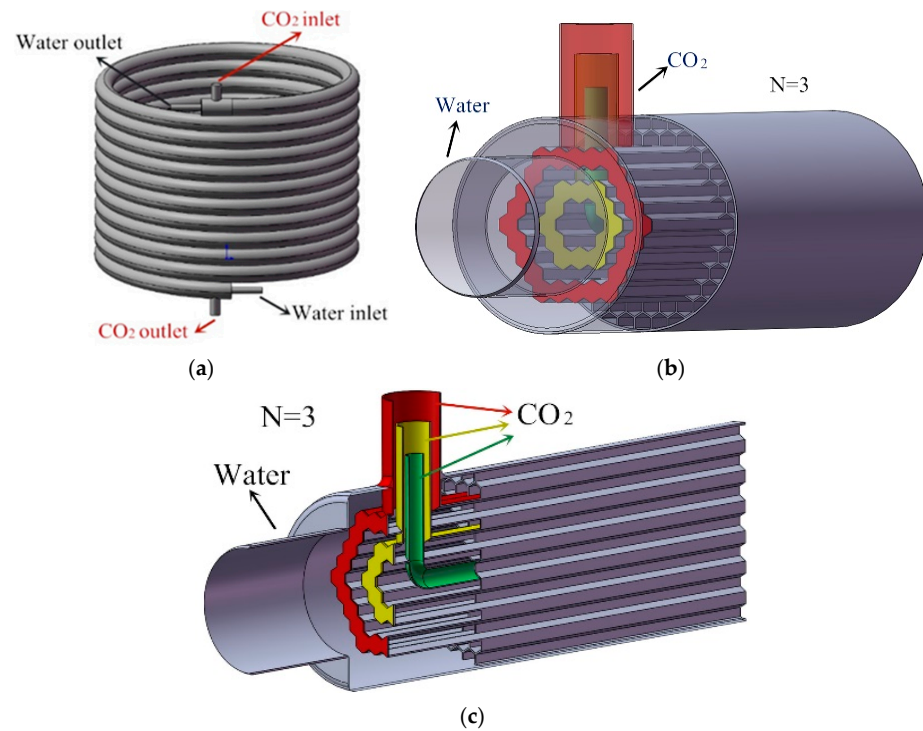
Physical model structure of the 3-layers honeycomb gas cooler: (a) external view, (b) perspective view, and (c) cutaway view [27].
